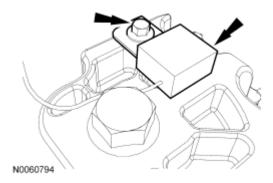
Locating Radio Frequency Interference Capacitor Bolt Courtesy of FORD MOTOR CO.
